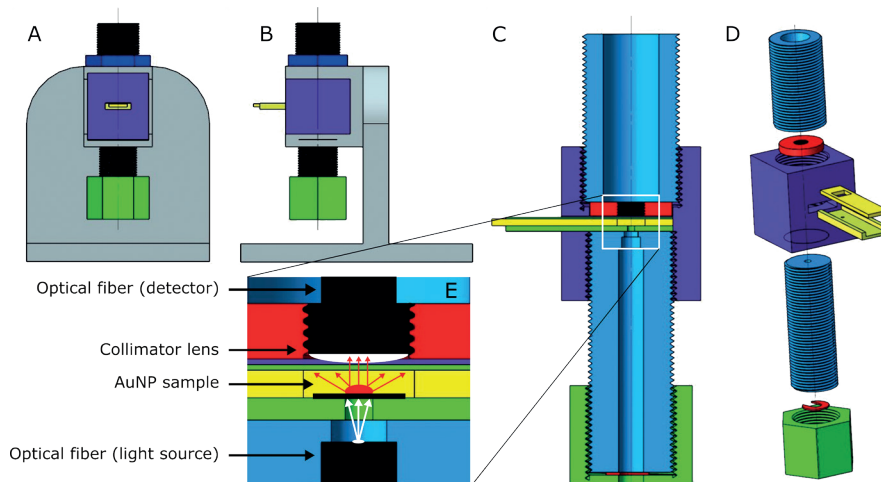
Schematic of the 3D-printed mount; A: front view, B: side view, C: cross section view, D: exploded view and E: optical light path
